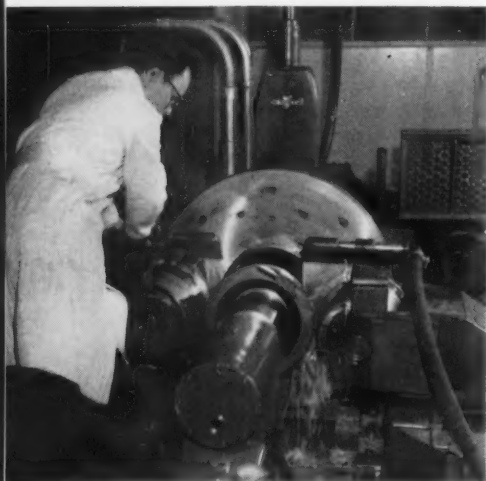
In this shoe assembly, one spool flange is fixed; the other is made adjustable.
